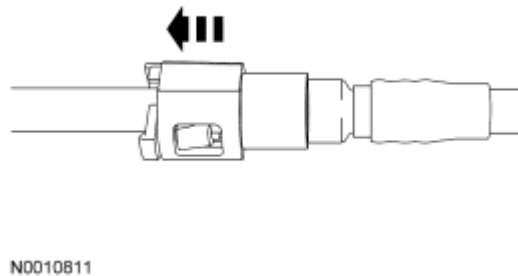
Installing Quick Connect Coupling Onto Tube Until Fully Seated
